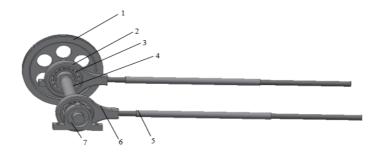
Assembly drawing of transmission section; 1: Belt wheel; 2: Bearings; 3: Eccentric; 4: Drive shaft; 5: Pull rod; 6: Connecting rod arm; 7: Bearing seat
